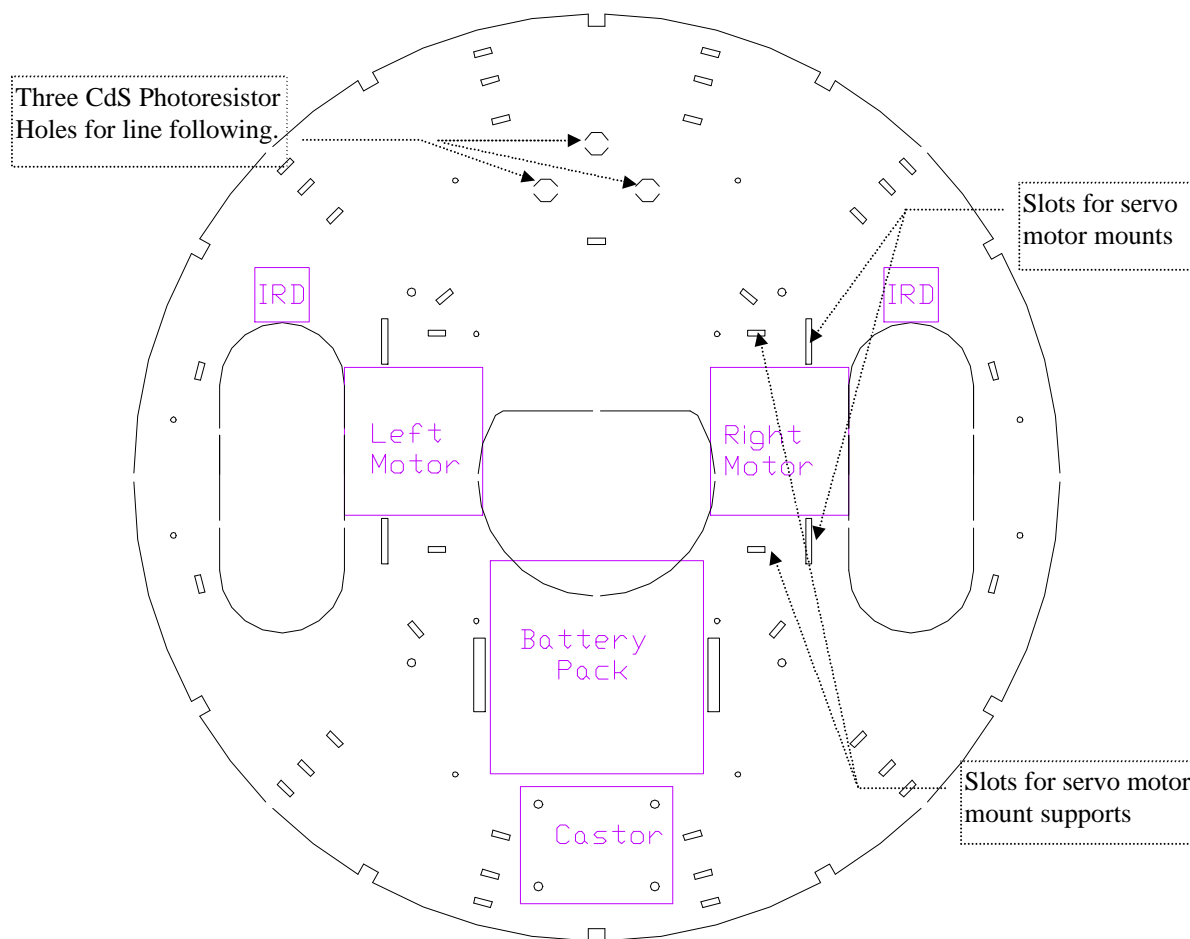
This drawing locates the servo motor mounts, the battery pack, and the caster on the underside of TALRIK™ as seen through the top surface. The IR emitter holders (TALIRE20) mount on the underside in the standard configuration. To minimize interference, the IR emitters should mount on one side of TALRIK™'s plate and the IR detectors should mount on the opposite side. The open end of the VELCRO™ battery strap should fasten on the underneath side while holding the eight AA battery holder in place. The optional placement of IRDs in front of the wheels provide edge (hole) detection. These are called *End-of-the-World™* detectors.
